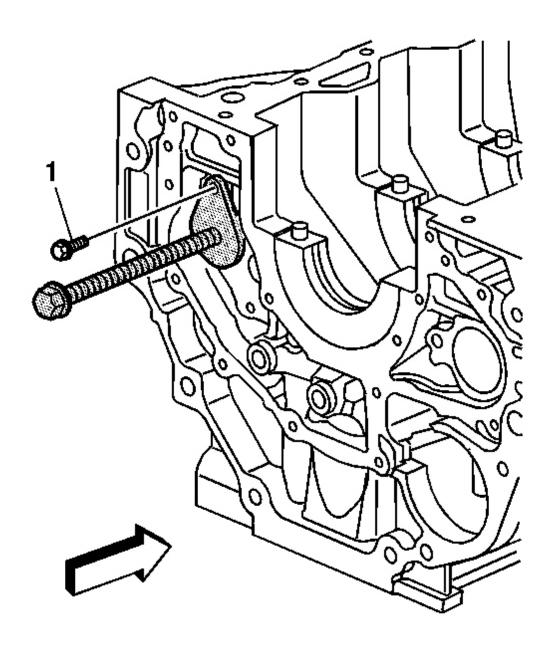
Installing Right Balance Shaft Mounting Bolt To J 44225 Courtesy of GENERAL MOTORS CORP.
